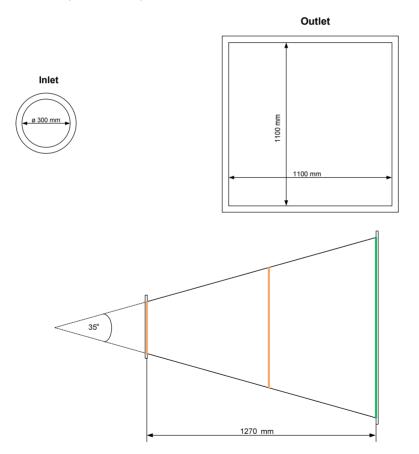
Diffusor dimensions. Top left: diffusor inlet; top right: diffusor outlet; bottom: diffusor view from the side (the positions of the screens are marked in orange and the position of the perforated plate is marked in green)
